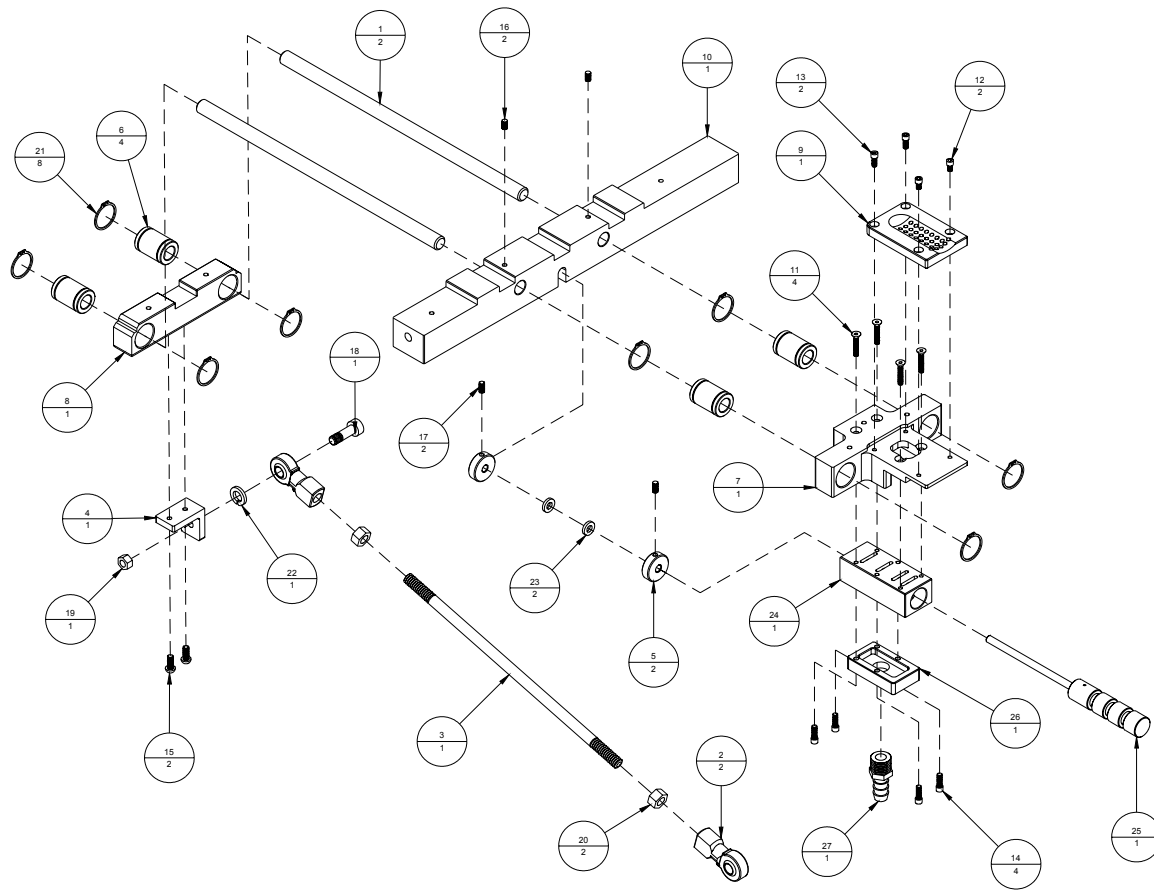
Shuttle Feeder Assembly (325603A)
